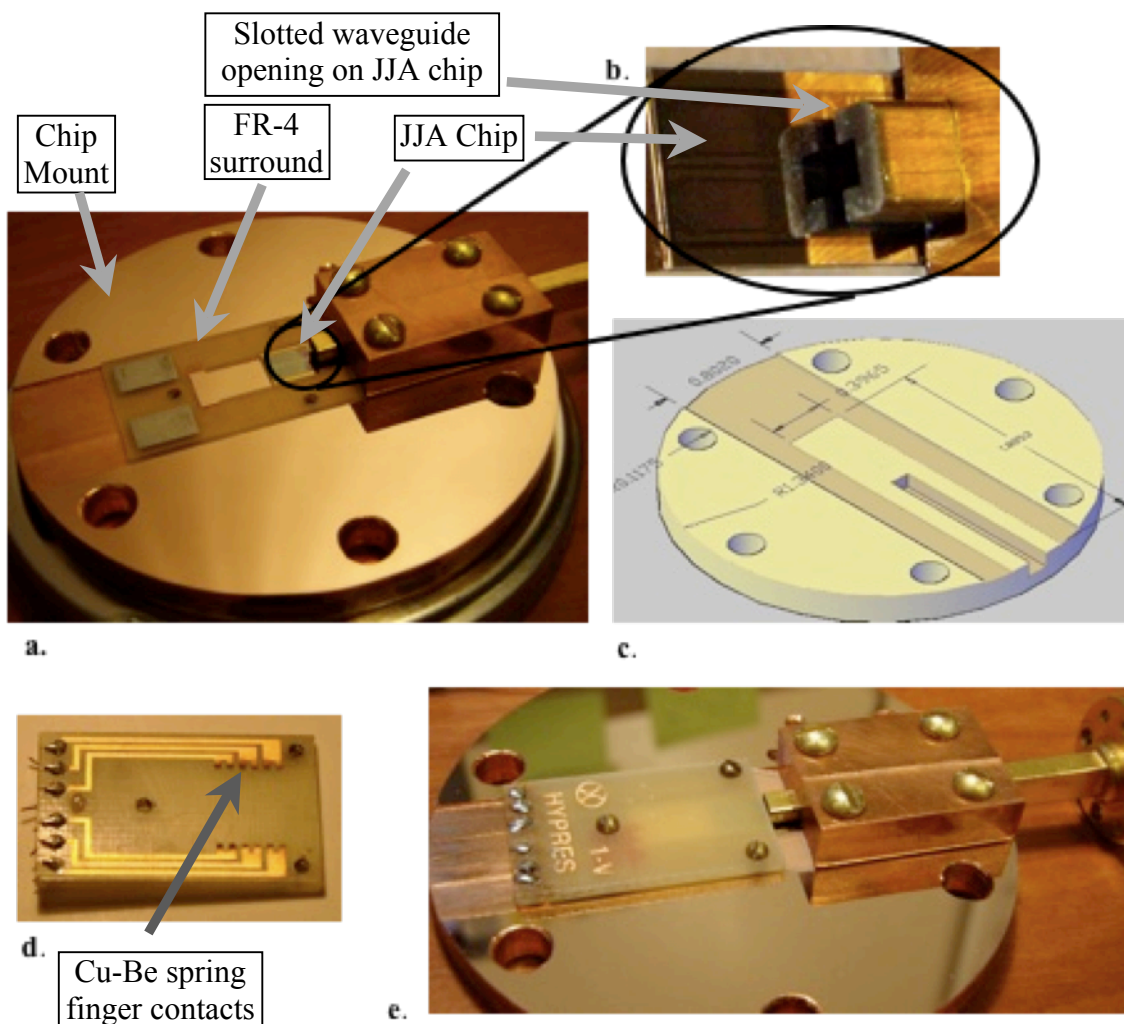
(a) Image of chip mount with the JJA chip and the FR4 surround; (b) position of waveguide and JJA chip; (c) dimensional representation of chip mount; (d) FR4 circuit board with Cu-Be spring finger contacts, and (e) complete assembly on chip mount.
